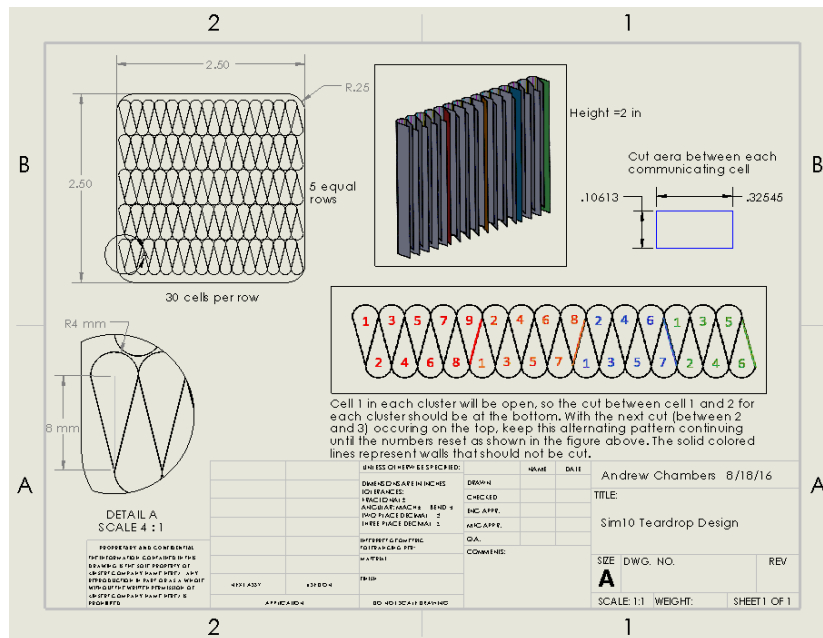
Sim10 teardrop core configuration design drawing, dimensions not otherwise labeled in [in].
